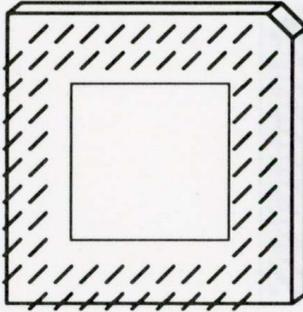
BOTTOM OF 68-PIN CHIP
